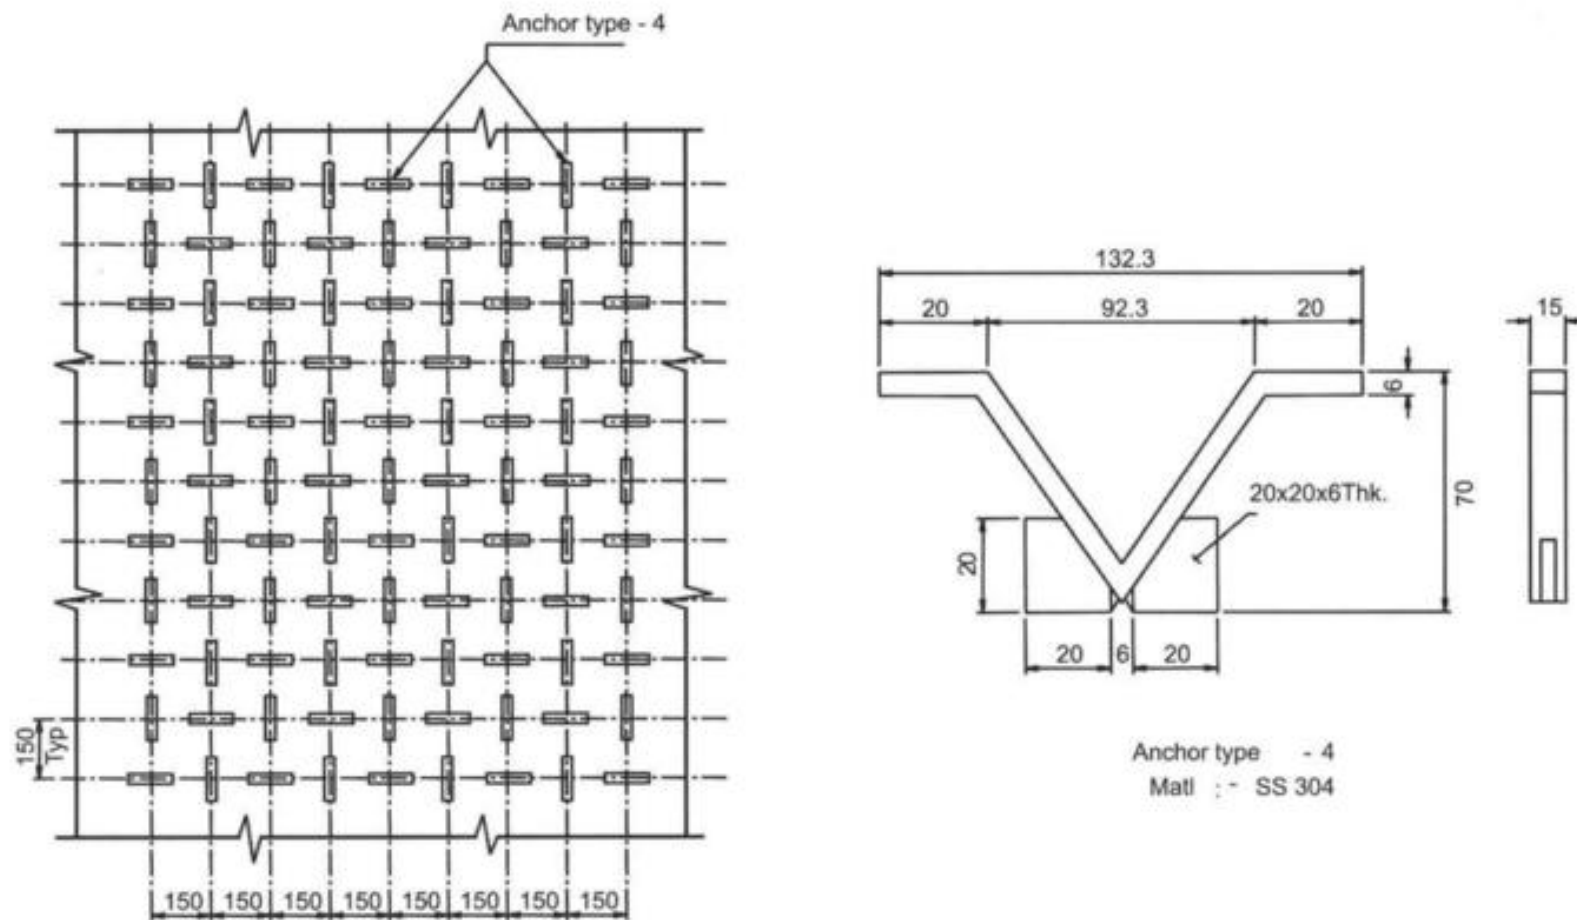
Typical anchor arrangement in the elbow and cooler tube.
